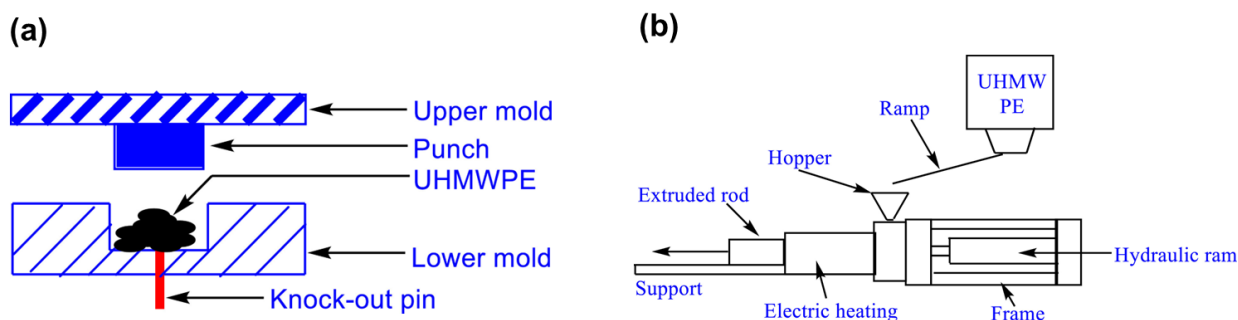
Schematic illustration of UHMWPE processing methods: (a) compression molding and (b) ram extrusion. Reproduced from Ref. 46.
